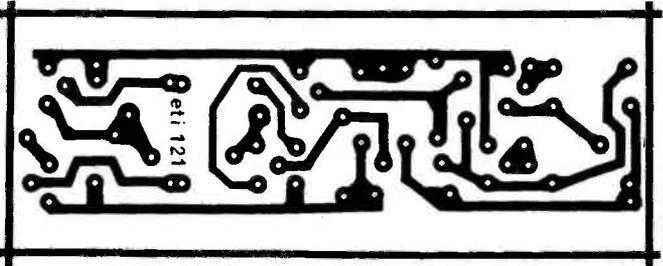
Printed circuit board for the pulser. Full size 23 x 65mm, or 23 x 85mm. If this board is made to 23 x 85mm (same scale as shown here) it will not fit into a solder tube case. In this case the board should be reduced to 65mm in length (as shown below). To save confusion when ordering the board ask for ET1121-85 or ET1121-65.
